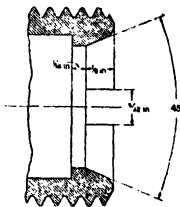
View of Outer End of Screwed Glands for $\frac{1}{2}$ in. and $\frac{3}{4}$ in. External Diameter Condenser Tubes.
